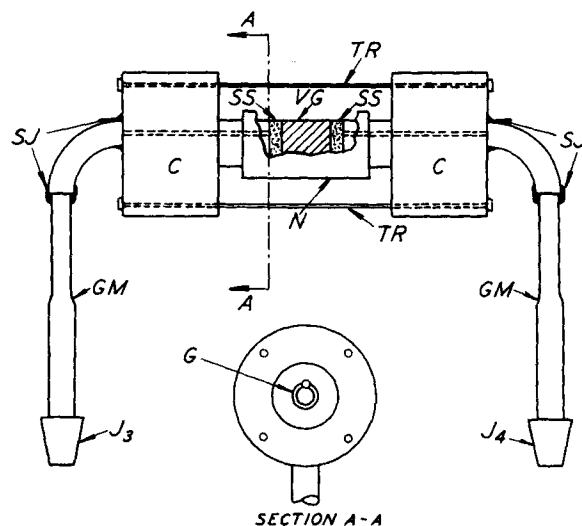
Diagram of plug assembly. C—copper end pieces (2), G—groove 1/32 in. wide by 1/32 in. deep, GM—glass-to-metal seals (2), J—ground-glass joints (2), N—neoprene tubing, SJ—solder joints (4), SS—porous stainless steel plates (2), TR—tie rods (4), VG—porous Vycor glass.
